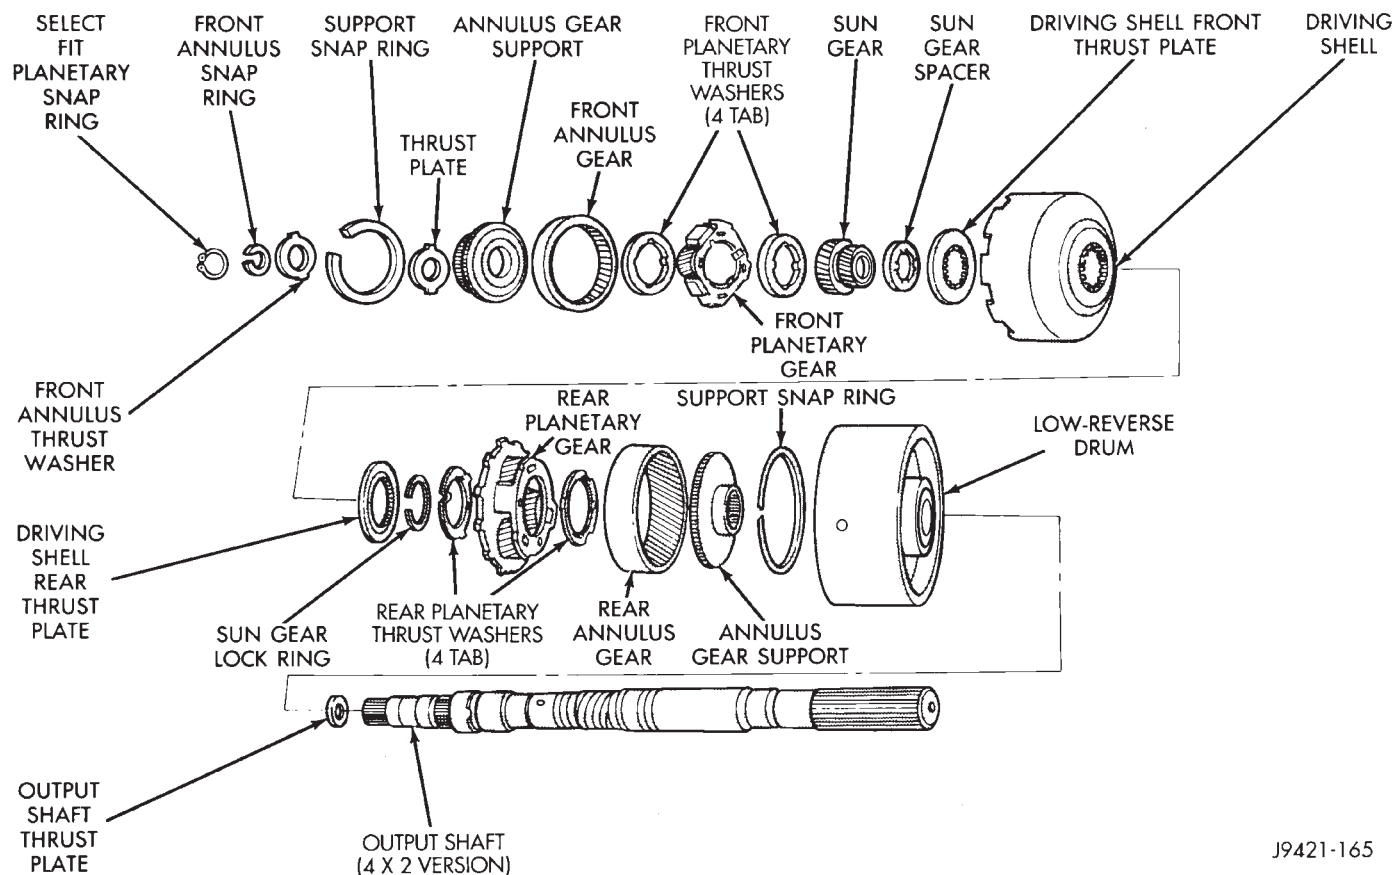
Planetary Geartrain Components (30RH/32RH)
